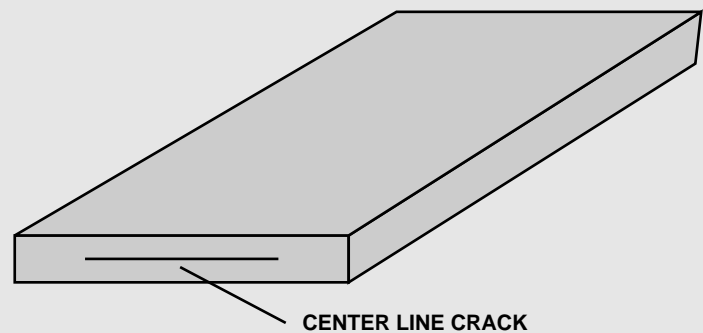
Centerline Crack in Continuous Cast Steel Slab
